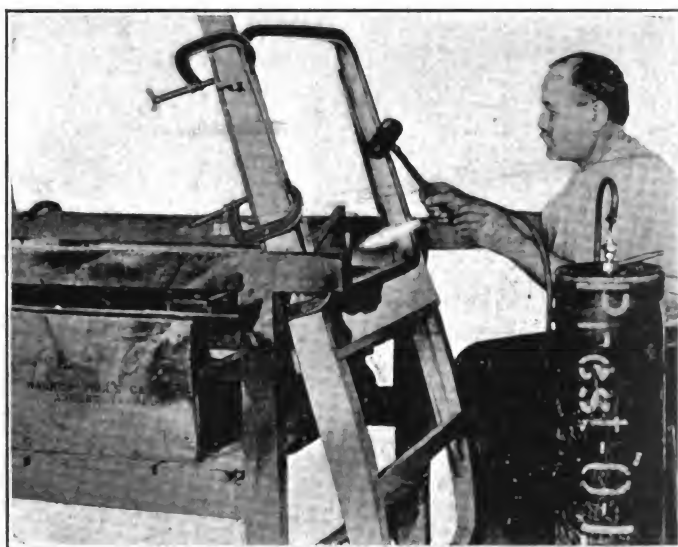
Annealing aluminum window frame opening with acetylene blow torch to facilitate hammering over frame without cracking
